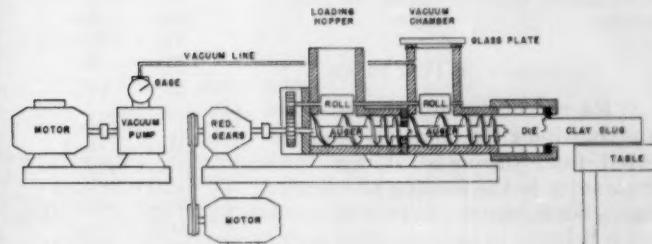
Vac-Aire "Experimental" Extrusion Machine.
